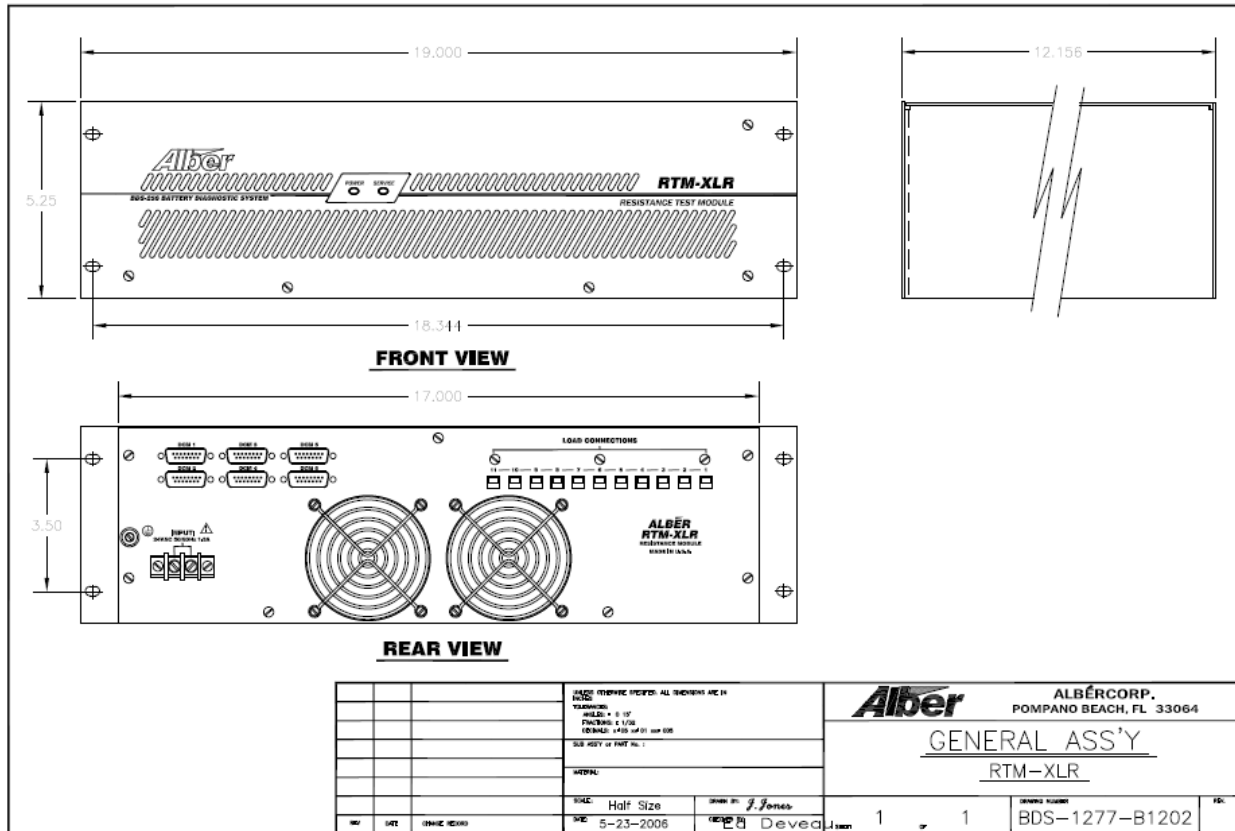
BDS-256XL Front and Rear View General Assembly RTM-XLR Drawing
